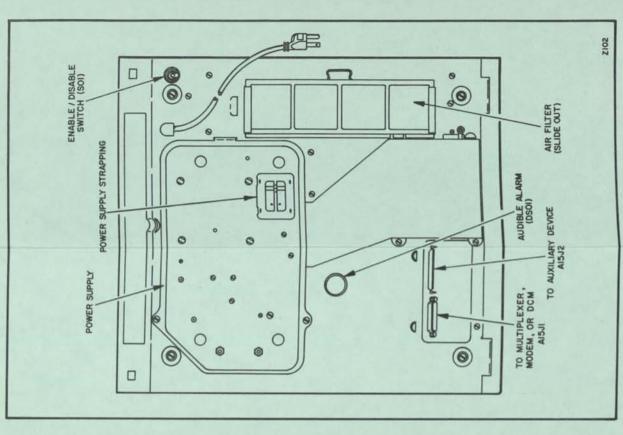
UNISCOPE 100 Display Terminal Bottom View
